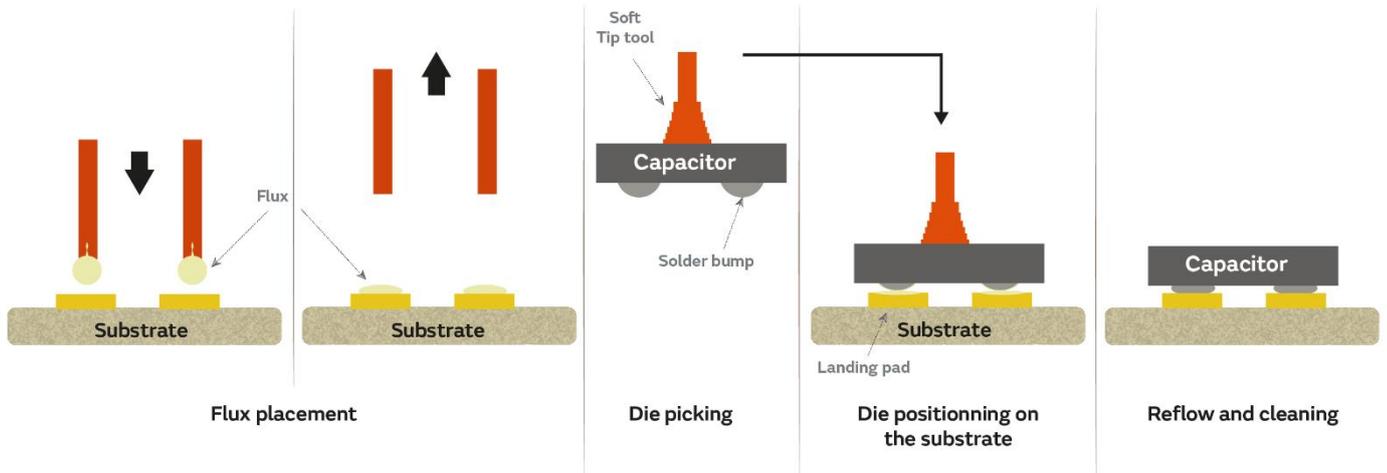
Assembly process by flux stamping on bumped capacitor with SAC305 terminations
